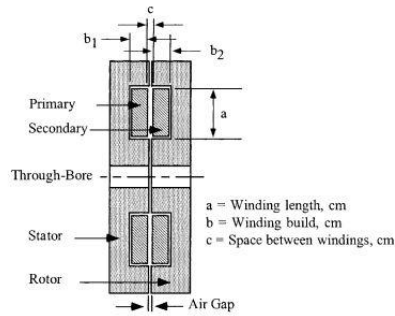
Flat Plane Rotary Transformer, Winding Dimensions [20]
